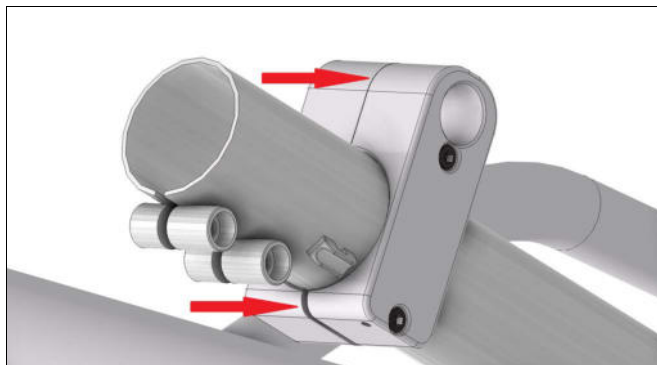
First tighten the upper screw, then the lower screw. Above the frame, the 2 parts must lie flush against each other.
